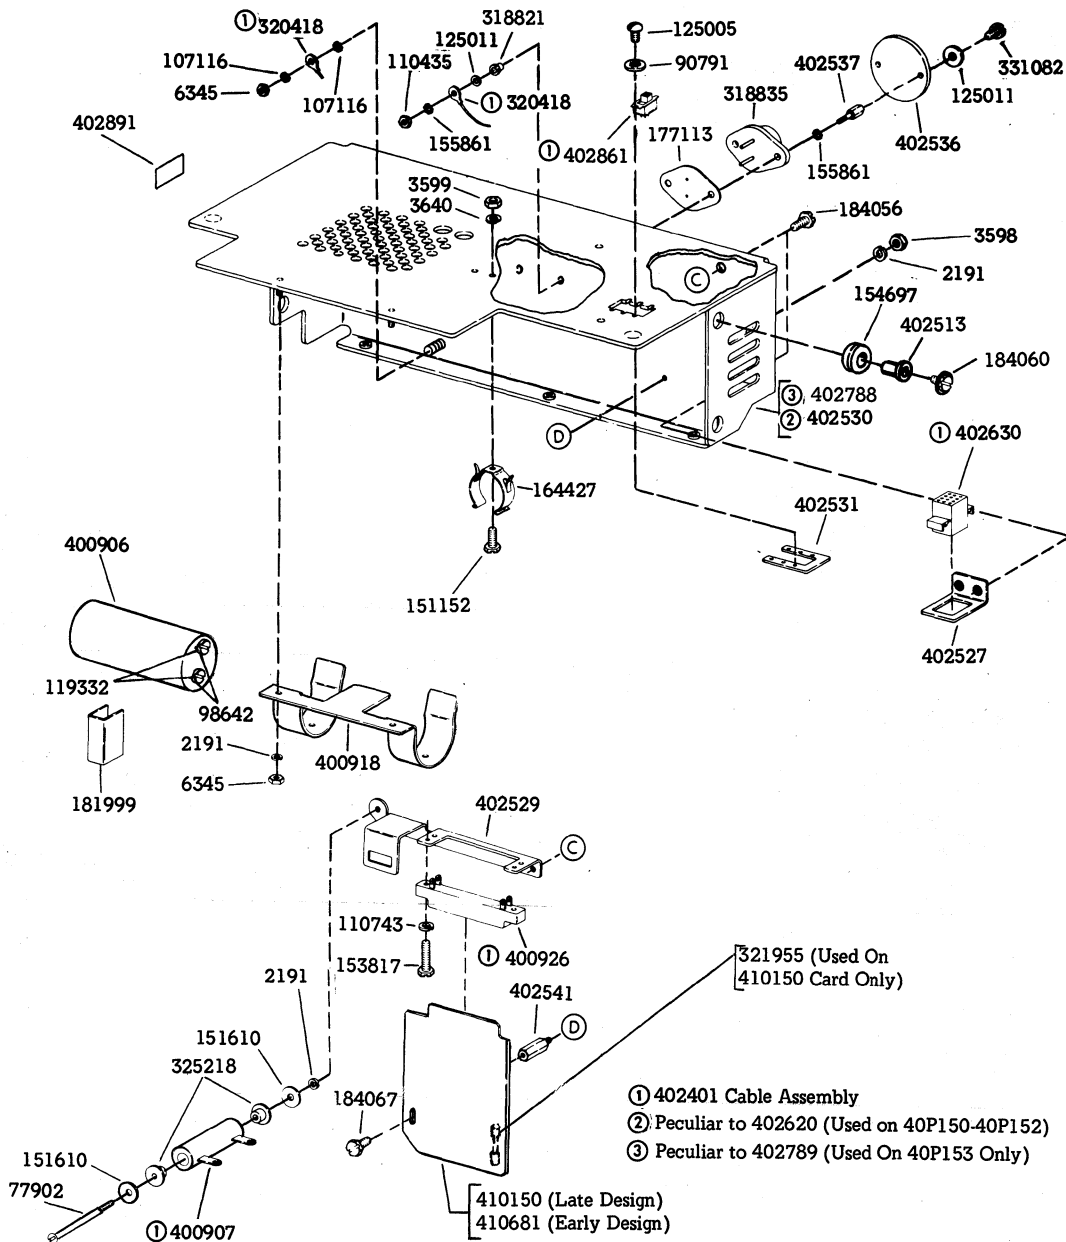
402620 and 402789 Power Module (Early Design) (Tractor Feed - 80-Column)
